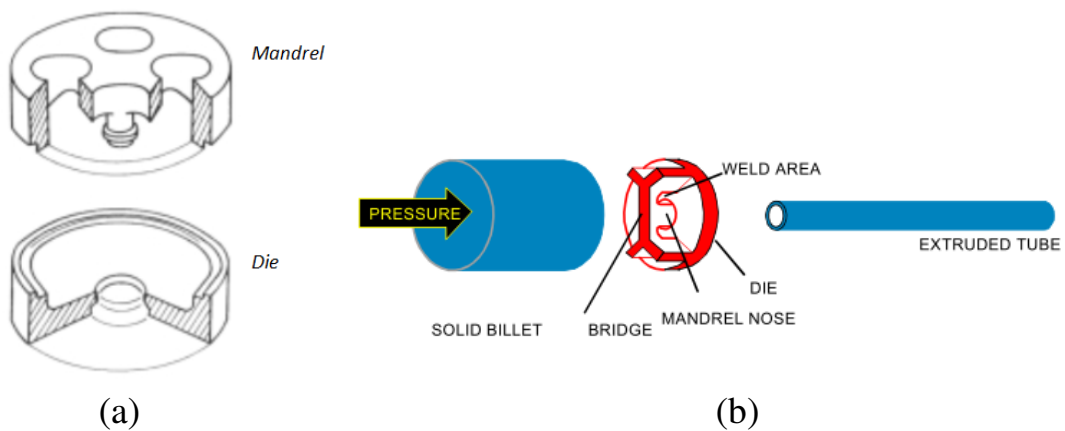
(a) Porthole die to realize a circular section tube [11]; (b) extrusion of hollow section [1].
